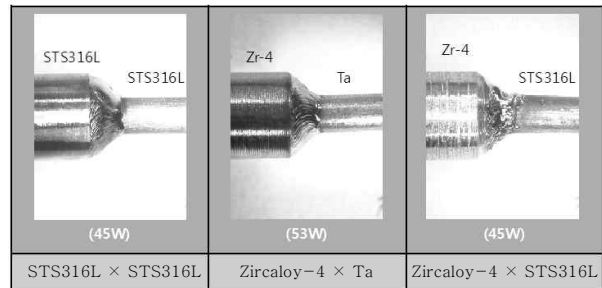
Macro-graphs of STS316L, Zr-4 and Ta welded specimens($\times 15$)
